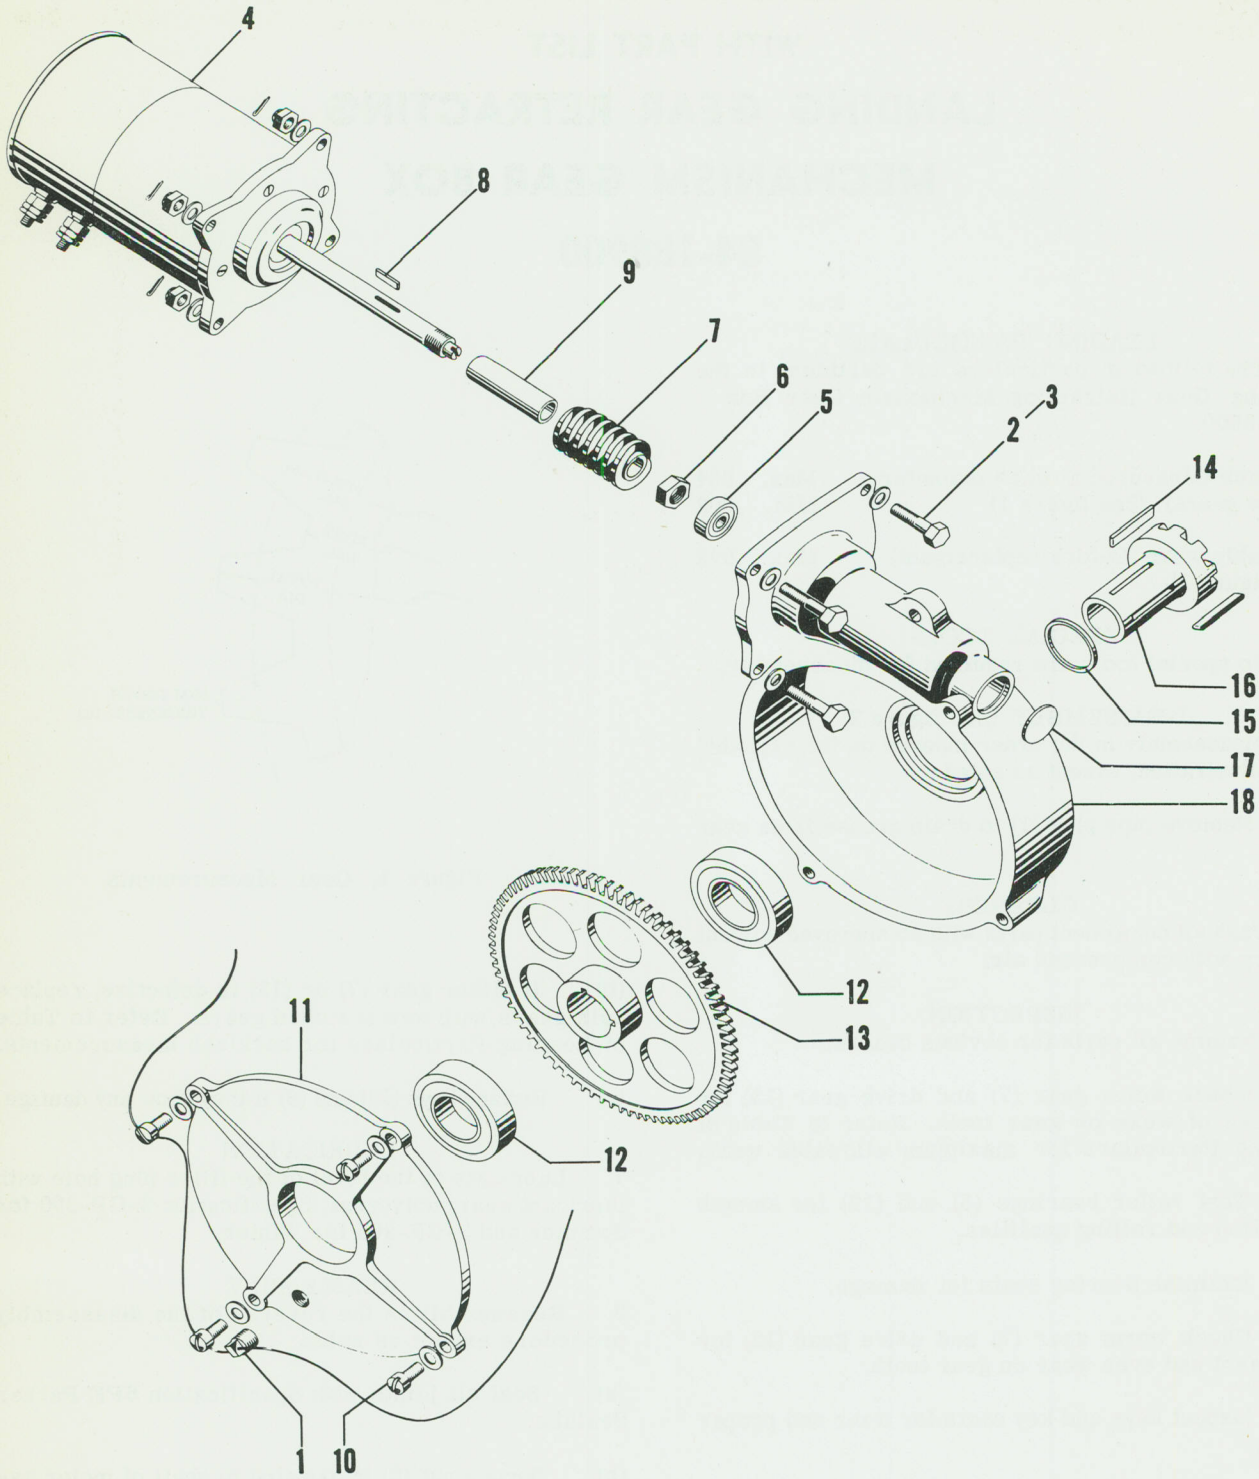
Landing Gear Retracting Mechanism Gear Box - 84-188900.
